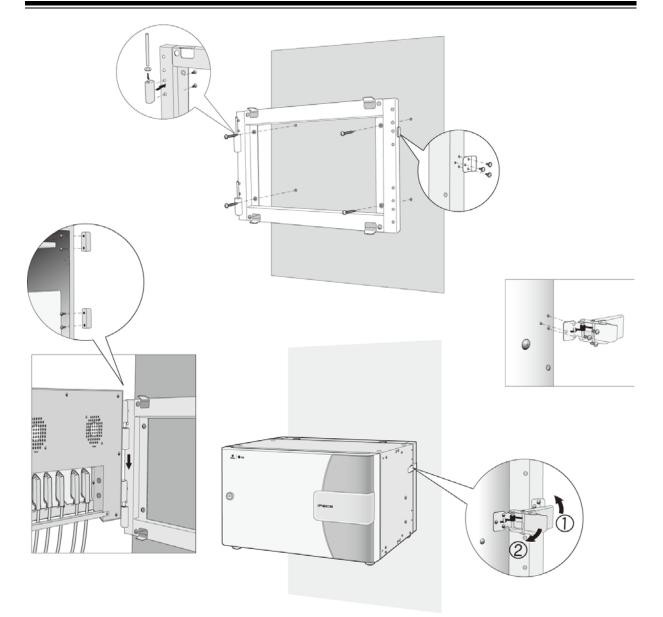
Cabinet Wall Mount Kit Installation
